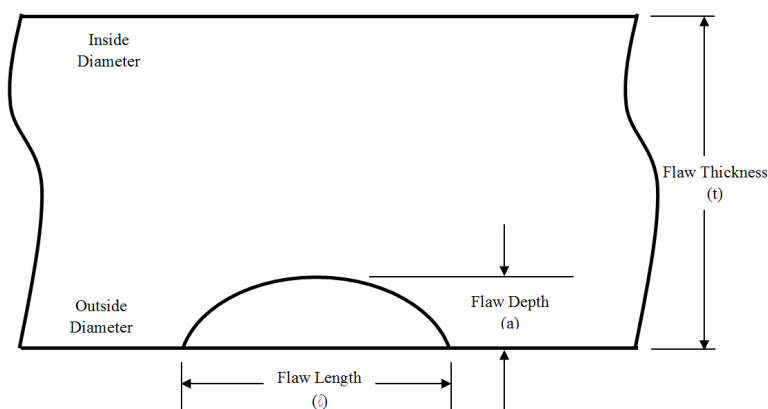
Illustration of SG to RCP Suction Nozzle DM Weld Outside Diameter Axial Flaw
